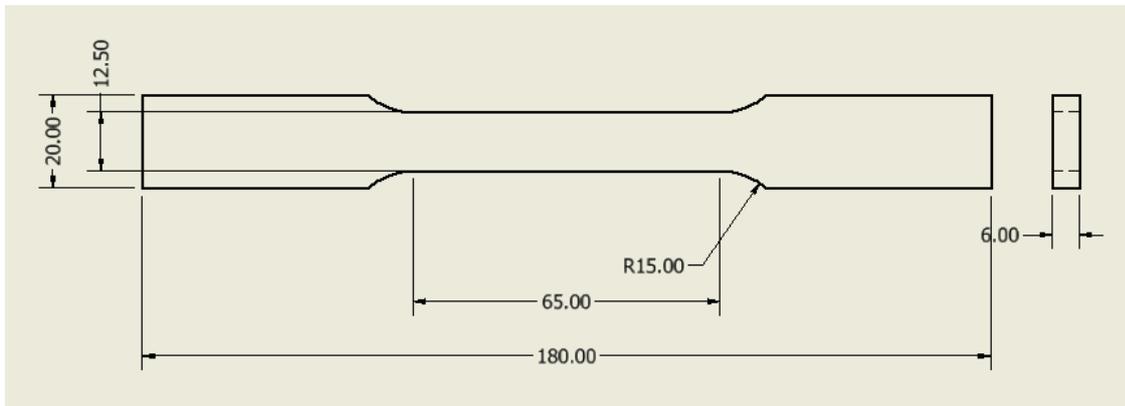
Dimensions of tensile test specimen made from ASTM E8
